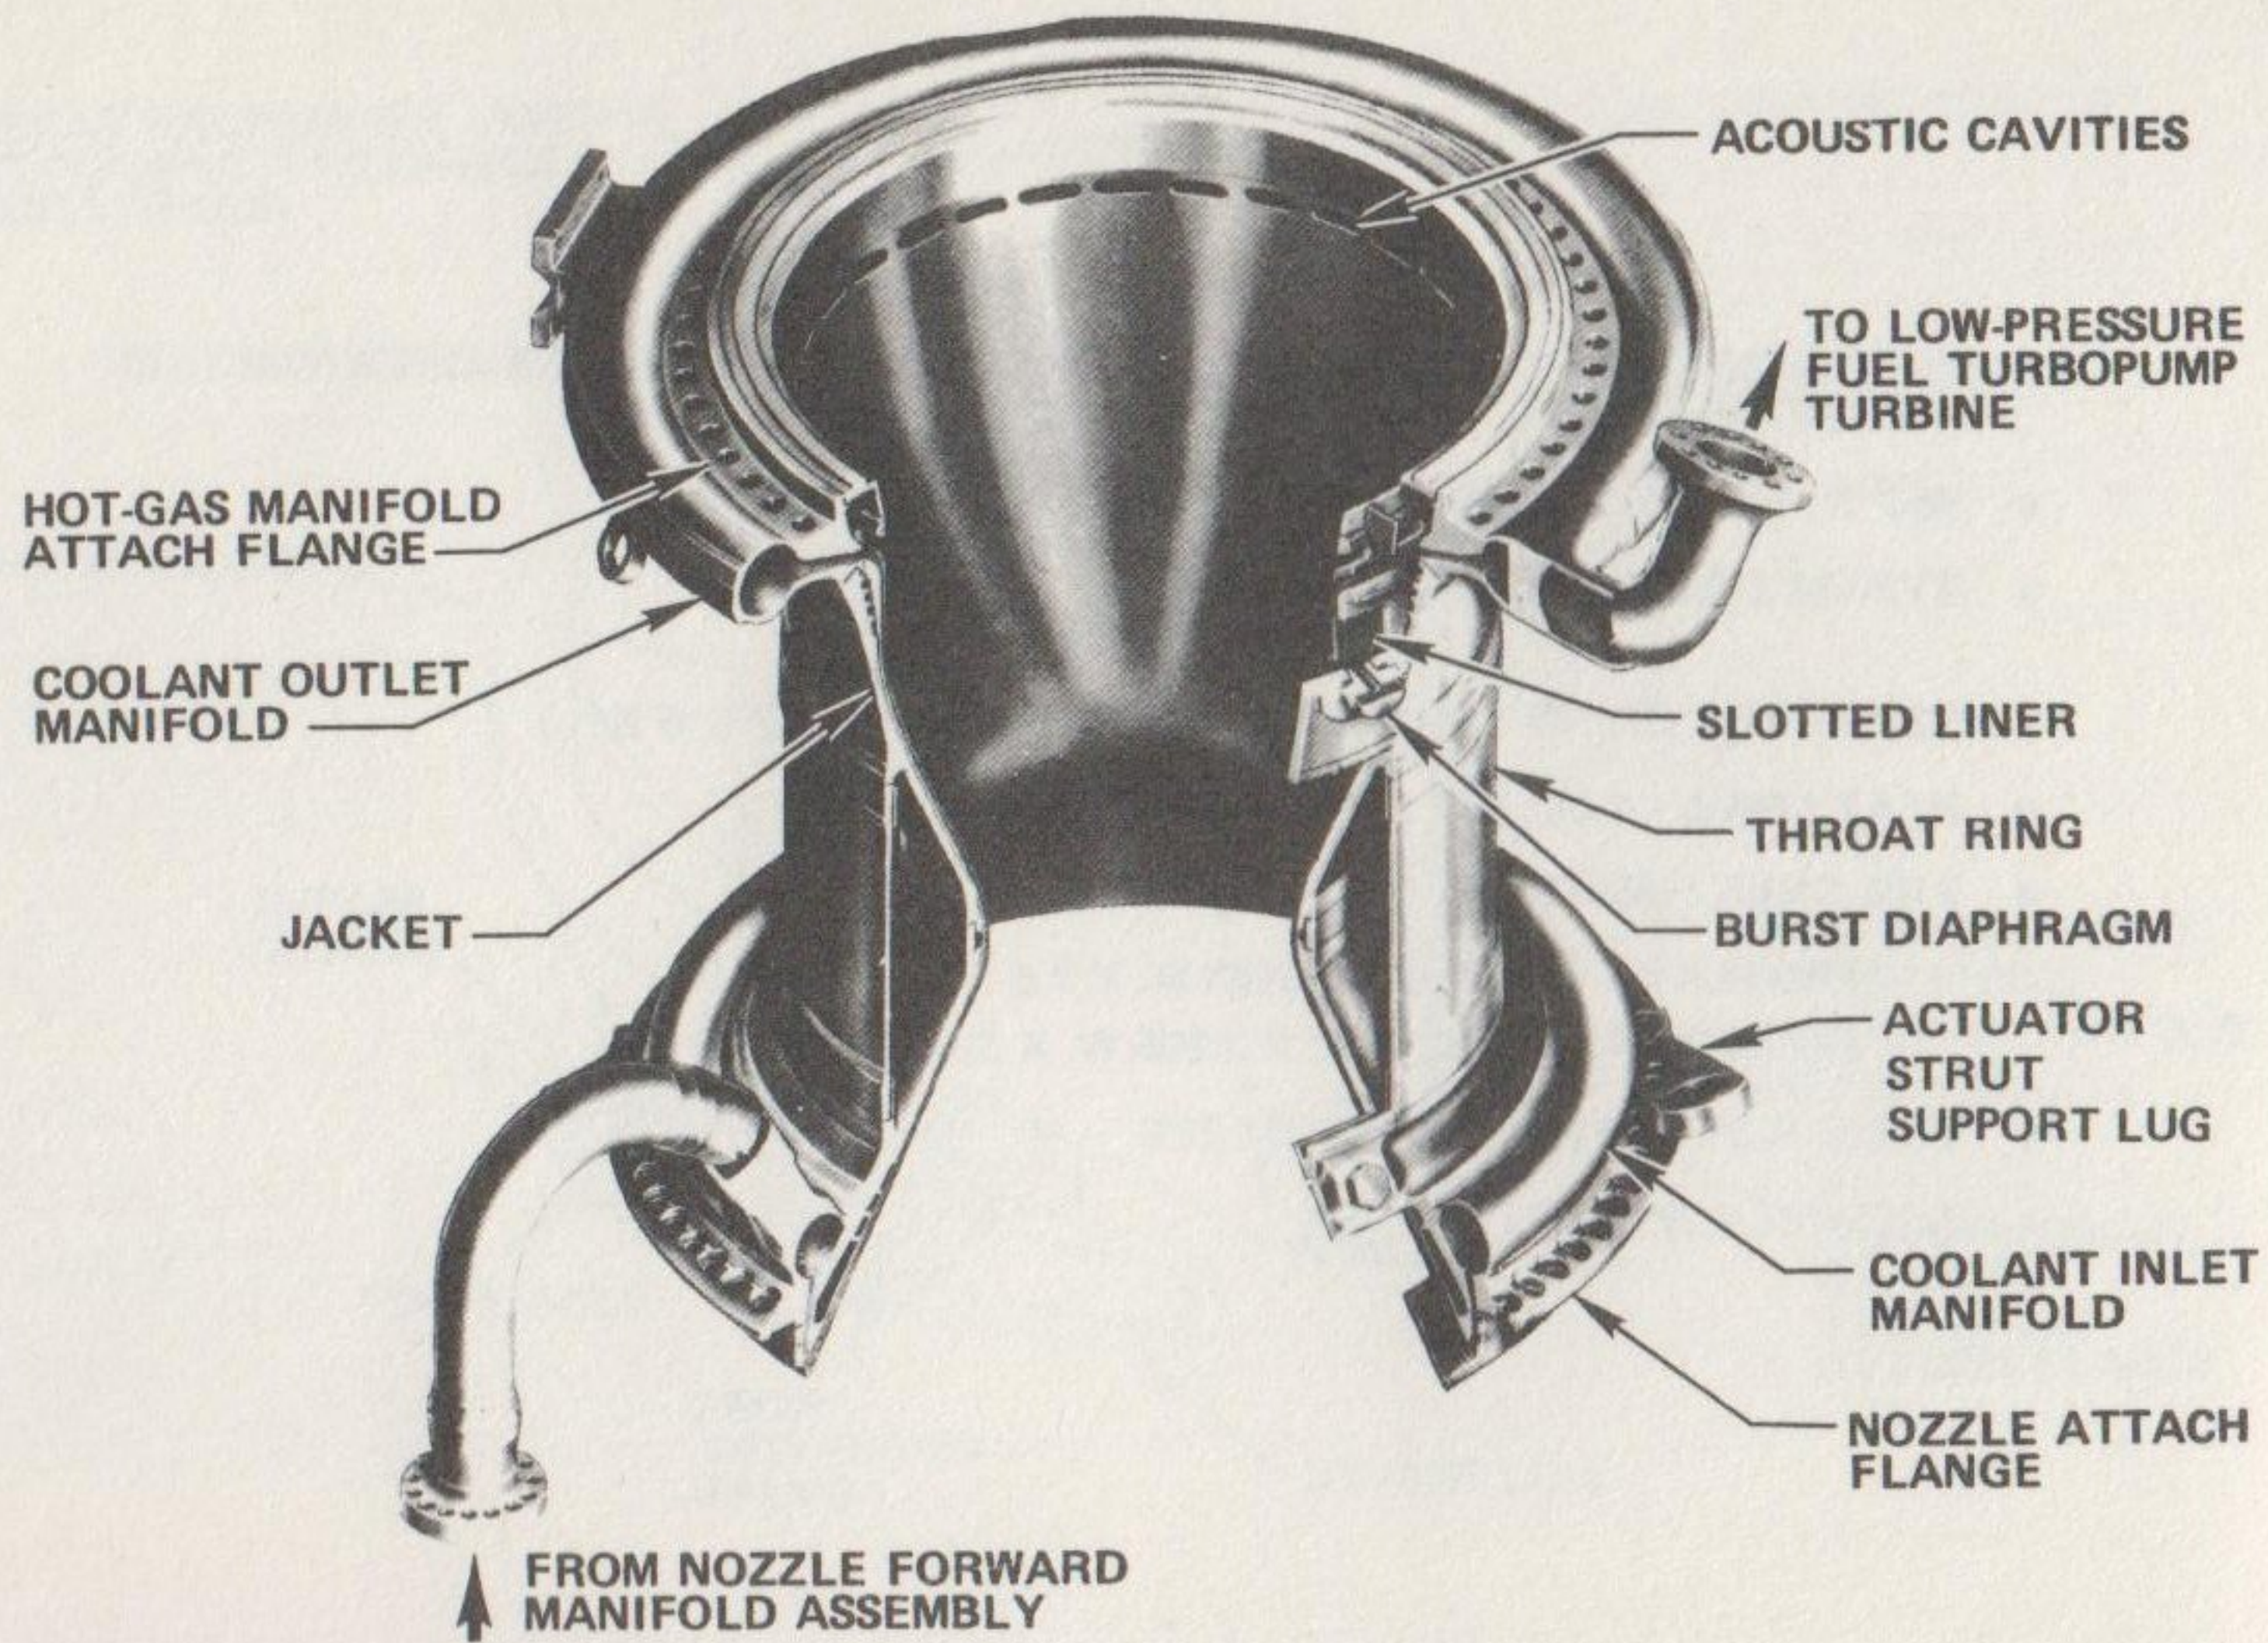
MAIN COMBUSTION CHAMBER (SHEET 1 OF 2)
